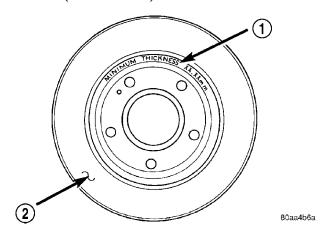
Minimum Brake Rotor Thickness Markings (Typical)
